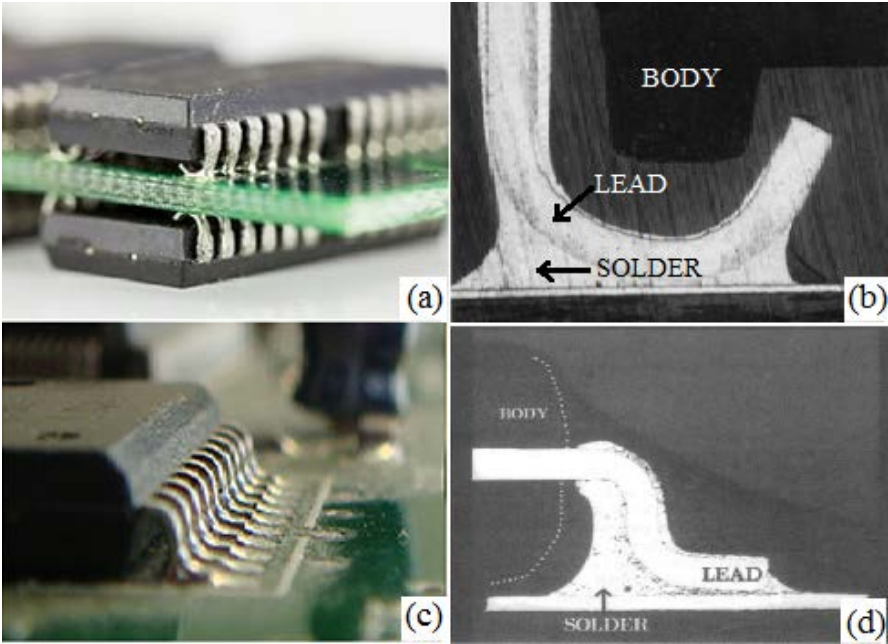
a) J lead package [12], b) Cross-section of J lead package [4], c) Gull wing package (right) [13], Cross-section of gull wing package [4]
